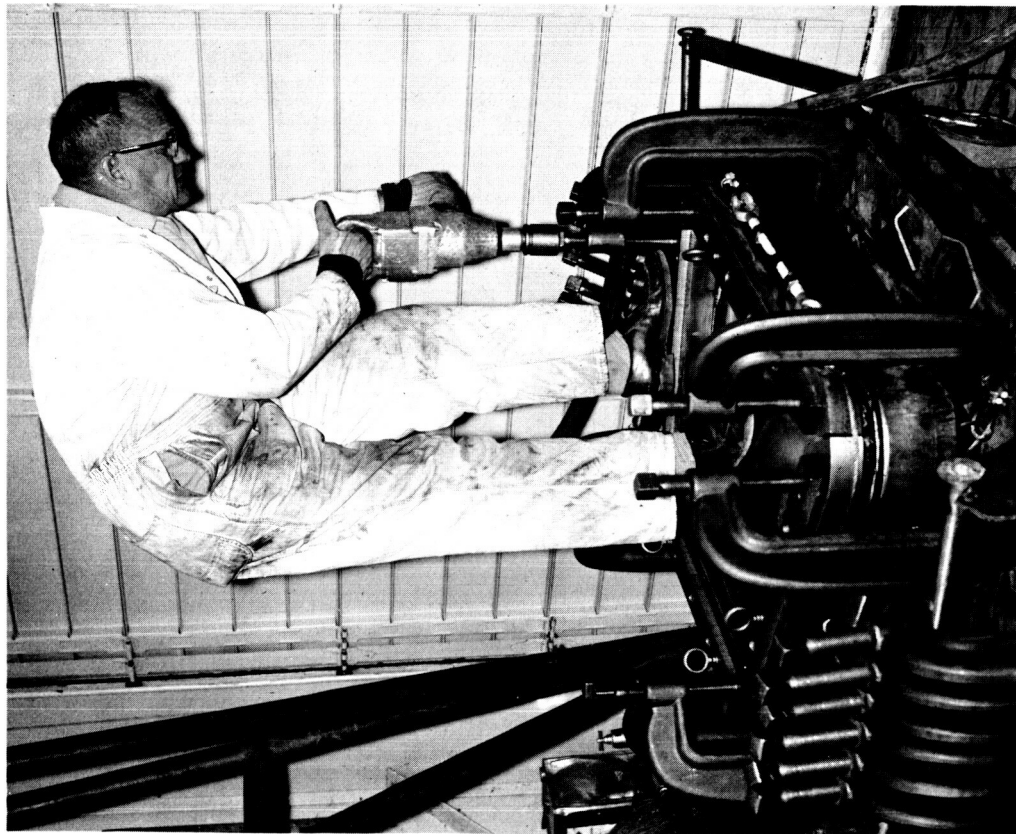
Blank Seating Using an Air-Driven Impact Wrench
